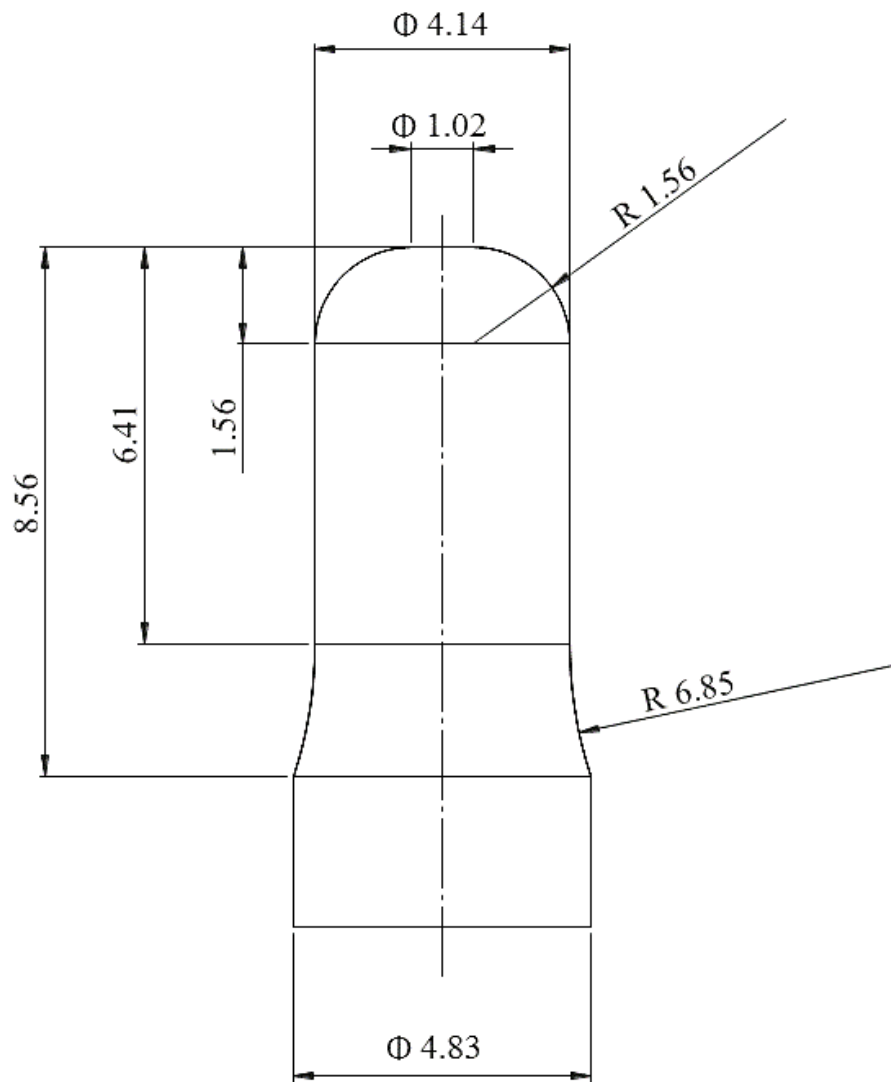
Details of workpiece used in the biocorrosion tests (Geometry 3).
